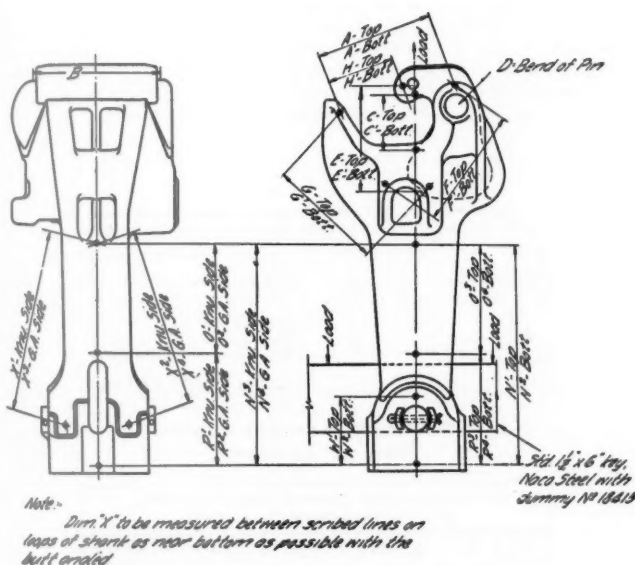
Arrangement and location of readings for conducting static tensile tests on A.A.R. Type E coupler with 6 3/4-in. by 8-in. swivel-butt shank
